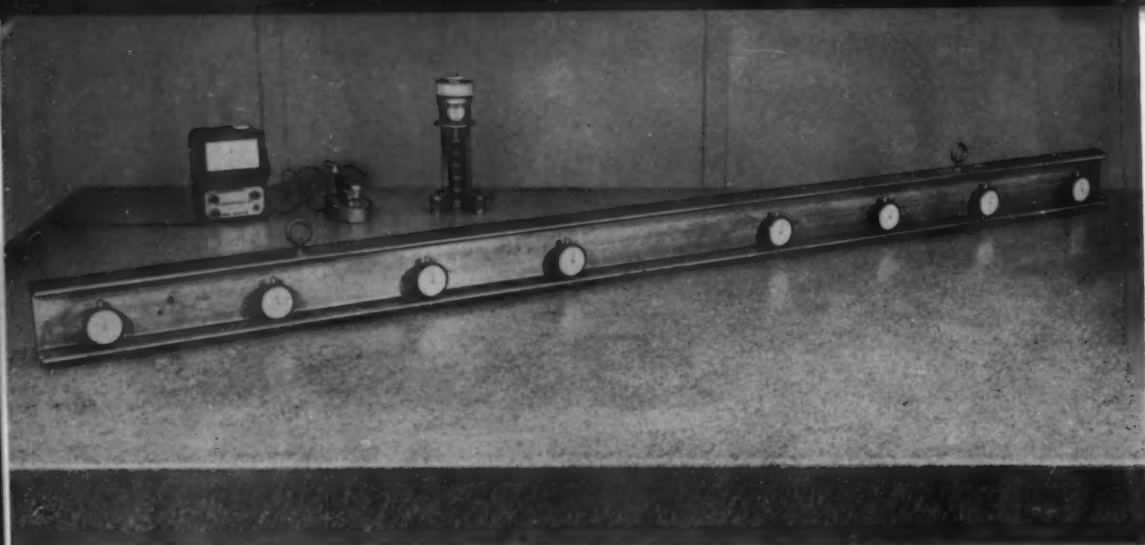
(Above) The beam-style checking bar is zeroed-in on a special granite surface plate before and after checking the lapper table.
